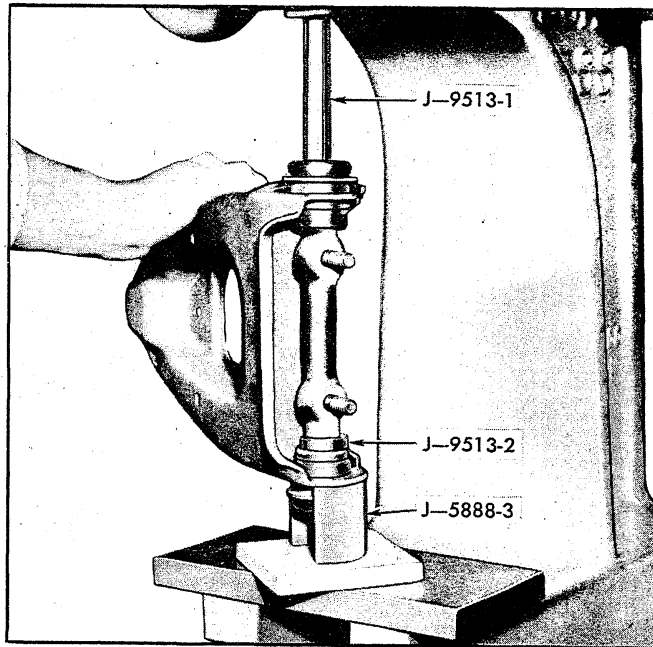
Removing Pivot Shaft Bushing - Chevy II
